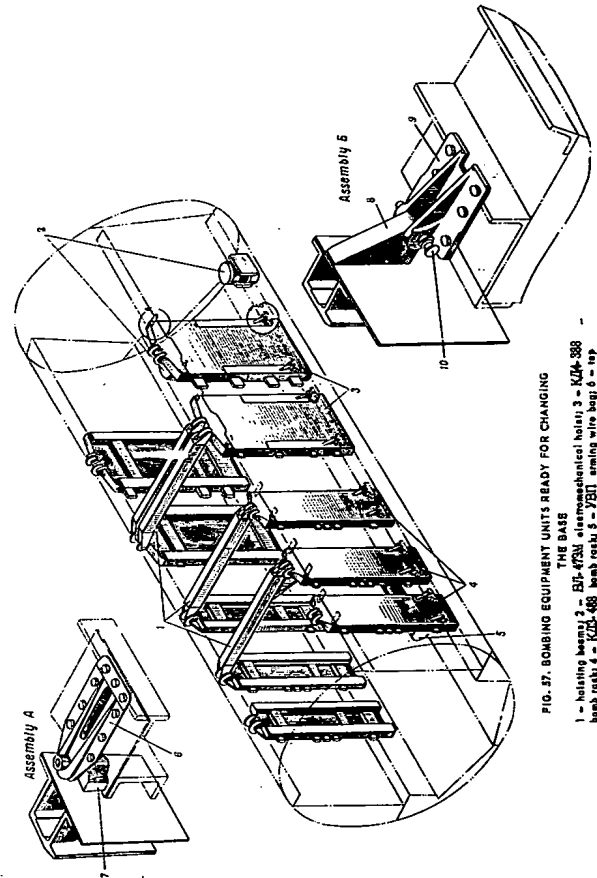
BOMBING EQUIPMENT UNITS READY FOR CHANGING THE BASE
